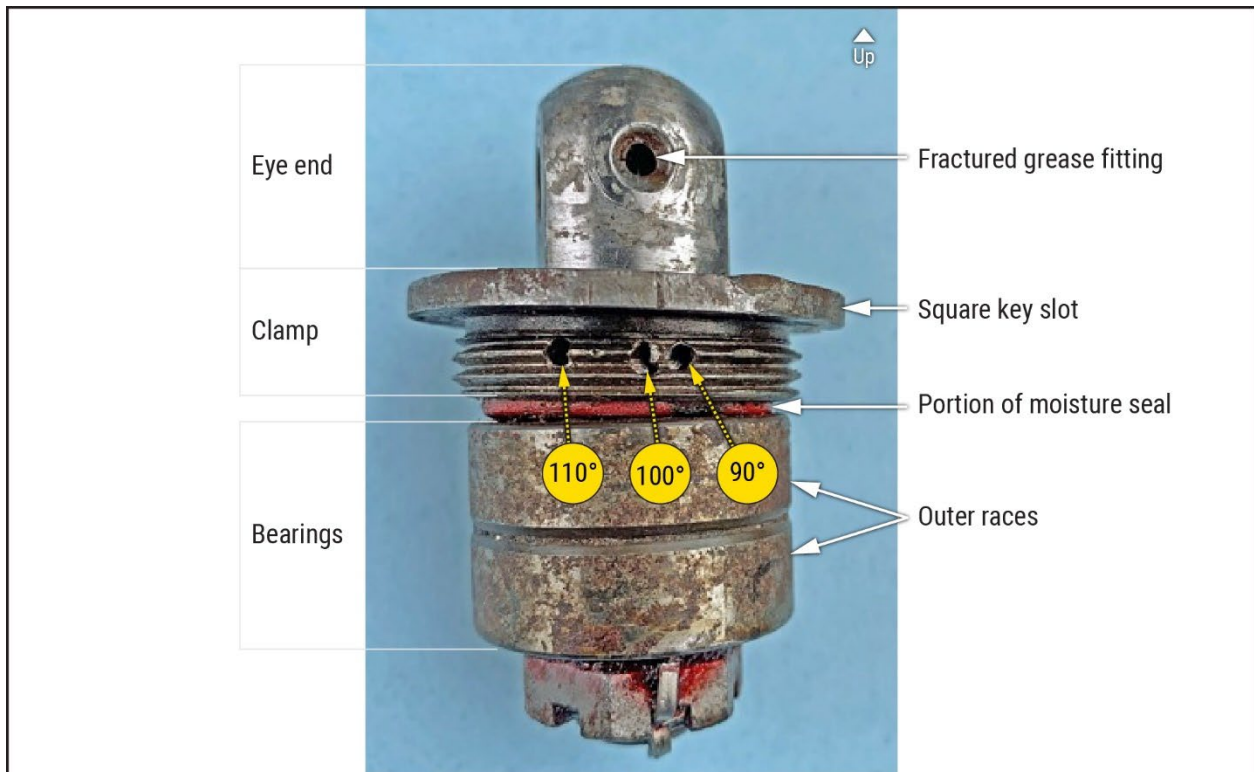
Photograph of the top eye end and bearing assembly showing three of five holes drilled into the clamp nut.
